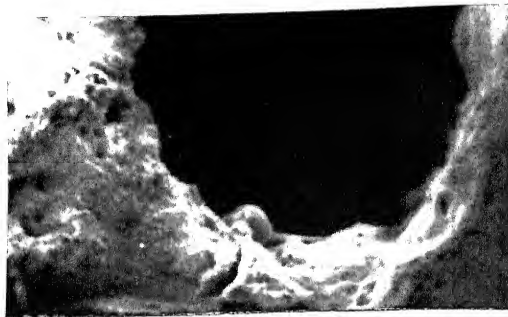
shows the crack developed at the machined surface. The probable reason for the crack is rupture of large hydrogen bubble in the vicinity of the specimen. At high supply voltages, the potential gradient becomes sufficiently high to cause the larger bubbles rupture and release heat of spark. This violent
